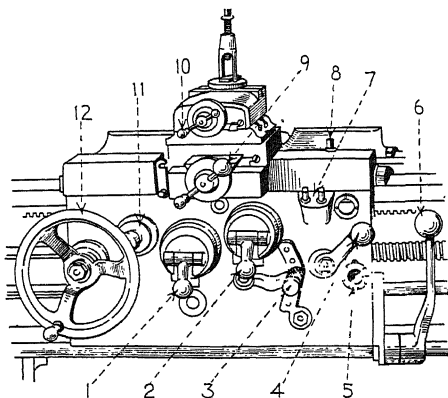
Lathe apron. 1, longitudinal feed control lever; 2, cross-feed control lever; 3, bevel-gear reverse lever [now in neutral, in which position the split nut (half-nuts) may be closed]; 4, split nut handle; 5, chasing dial (used when cutting threads); 6, control handle; (carried with the apron) operates the clutch and brake in the main drive to start and stop the machine (in some machines operates the one tooth forward and reverse clutches to start and stop the lead screw in either direction); 7, one-shot oiling reservoir; 8, carriage clamping screw; 9, cross-feed handle; 10, compound-rest feed handle; 11, handle for disengaging feed-rack pinion; 12, long feed hand wheel. (Courtesy of The American Tool Works Company.)
